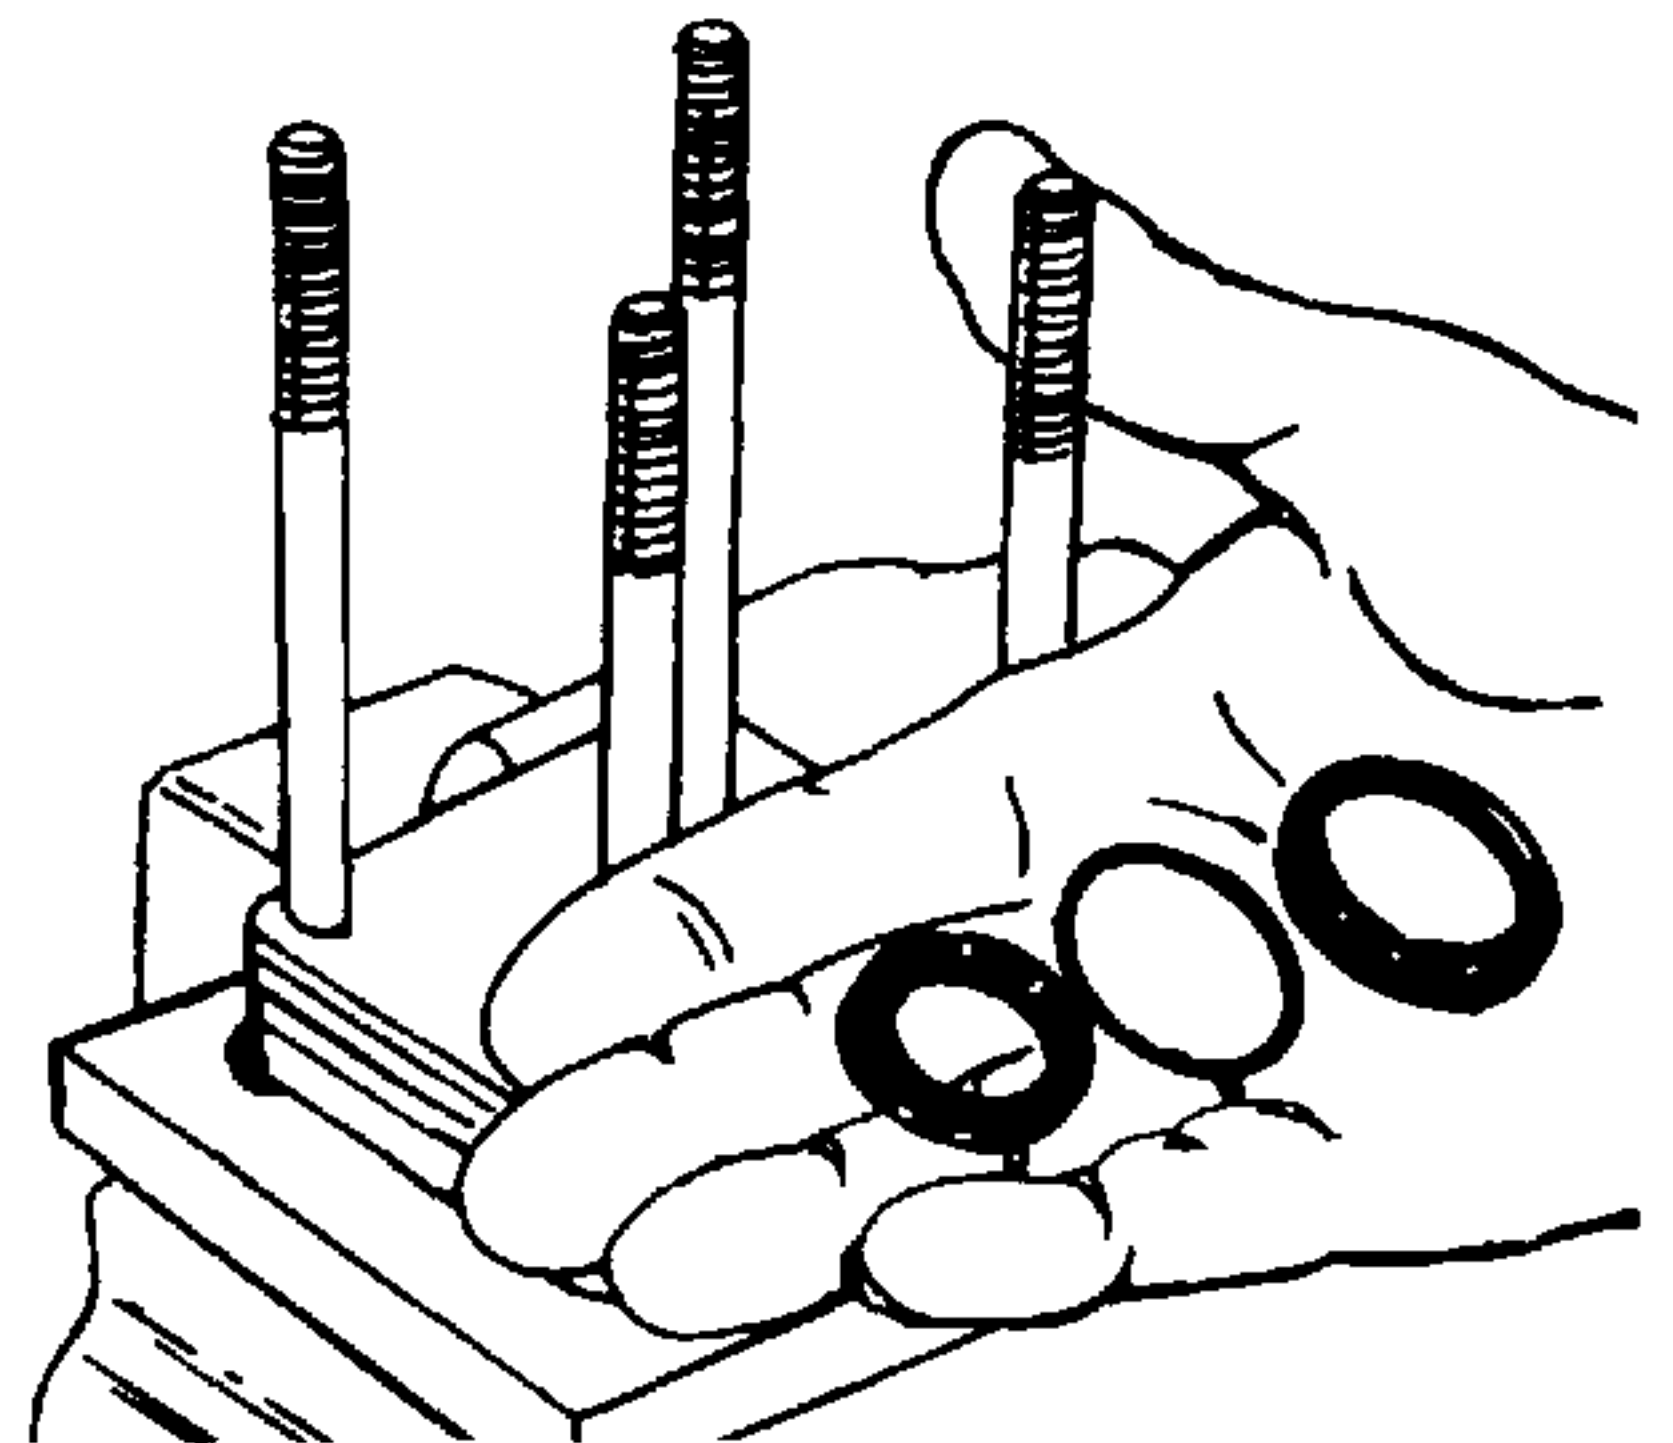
Assembling Face Seal, Back-Up Ring and Spacer.
